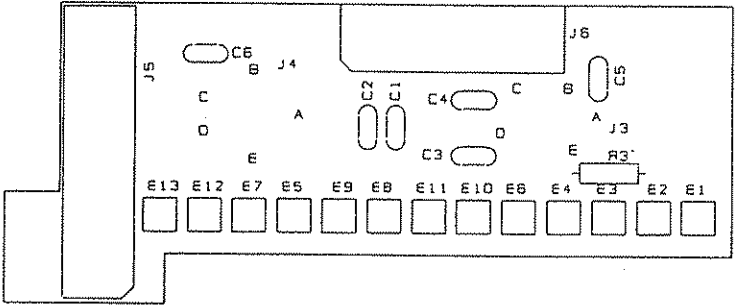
Front Panel Assembly 3A1, page 1 of 6.
